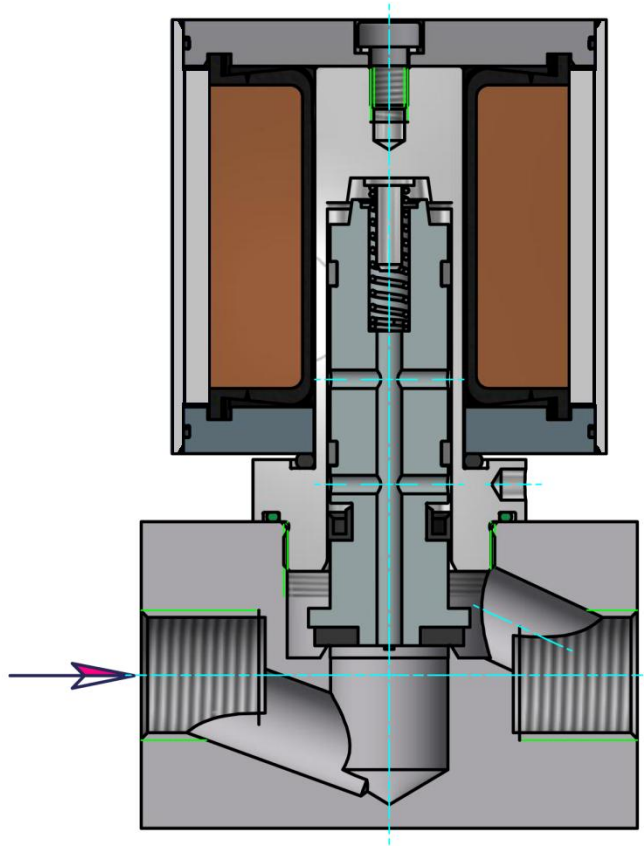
thread design, DVS... with dirt trap (116.002.295)
